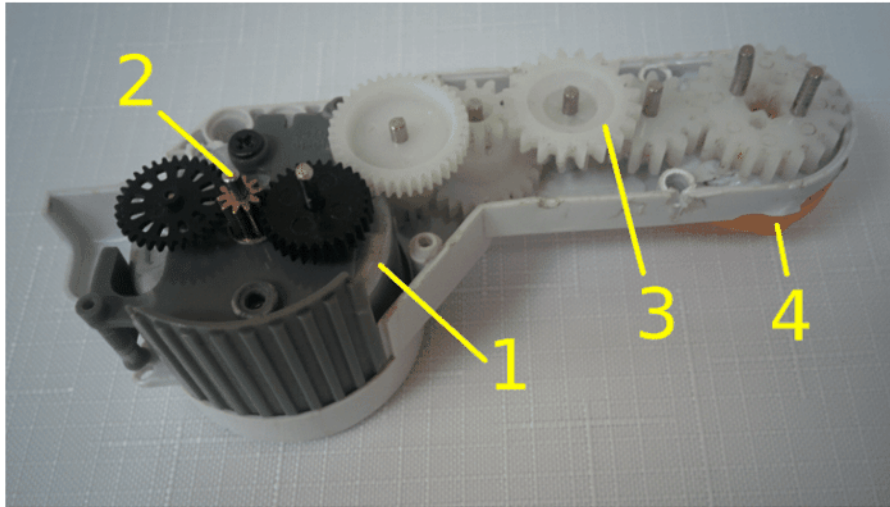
NXT motor disassembled: 1 — DC motor 2 — it's shaft, 3 — reducer, 4 — NXT motor external shaft; (chip with encoder isn't shown).
